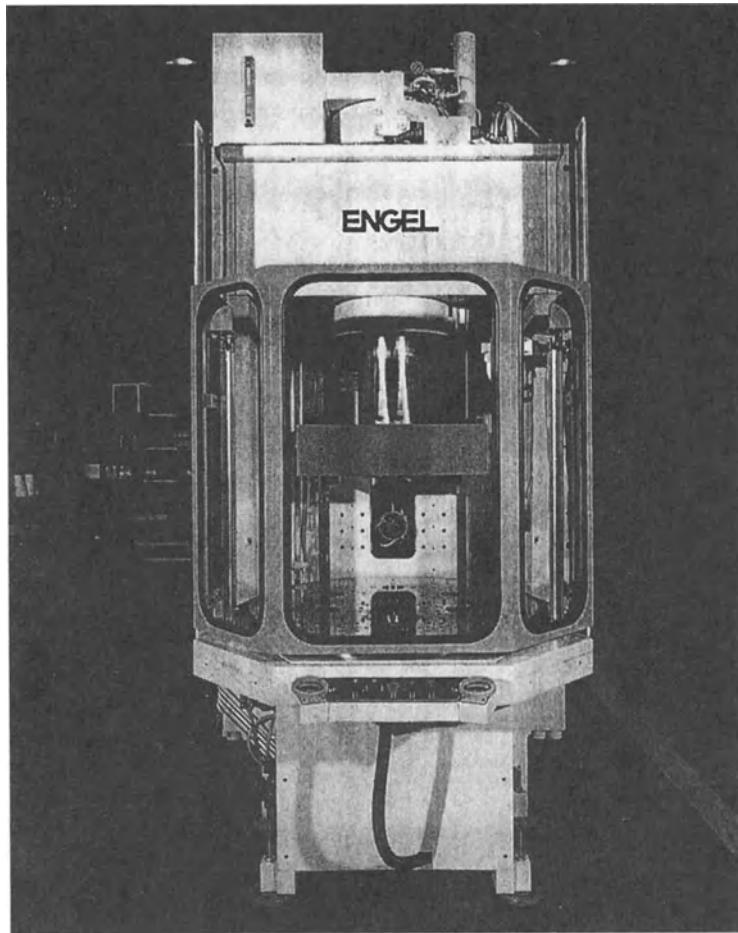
Engel's 200-T rotary-bridge-type machine.
